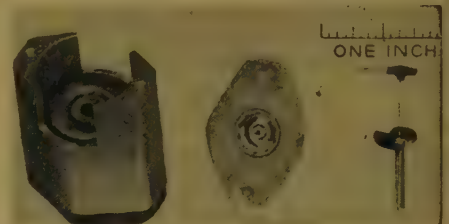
Disassembled view of synchroscope mechanism showing top of 3-phase winding, top bridge, and rotor assembly
